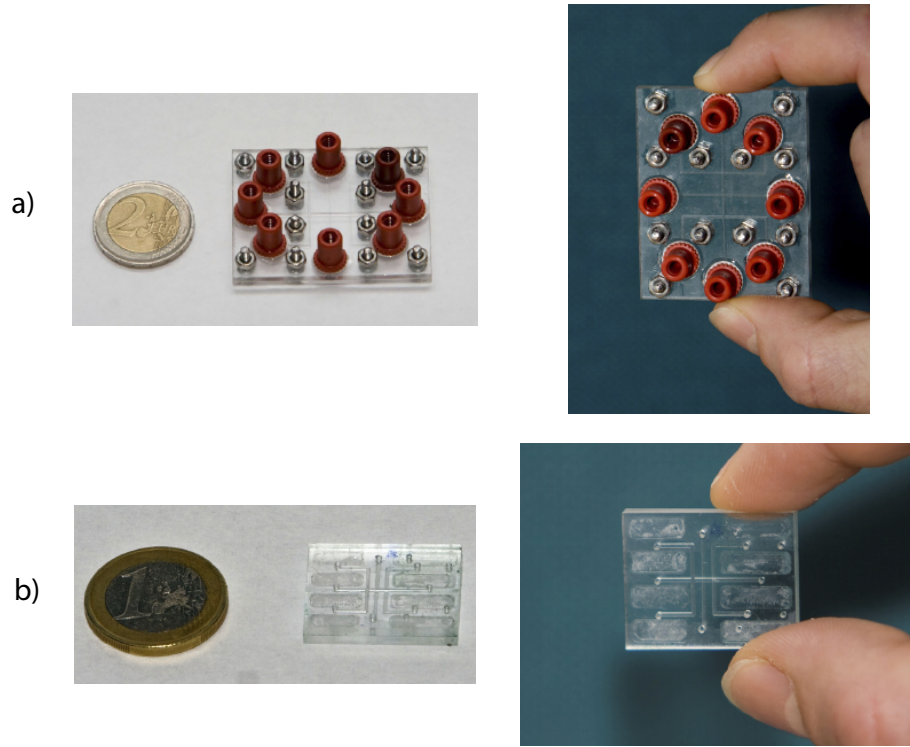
Prototypes manufactured by CNC milling. Bonding between top and bottom layer is made using a) twelve M2.5 screws and b) 0.2mm thick double sided medical adhesive tape. €1 and €2 coins are shown for scale.
